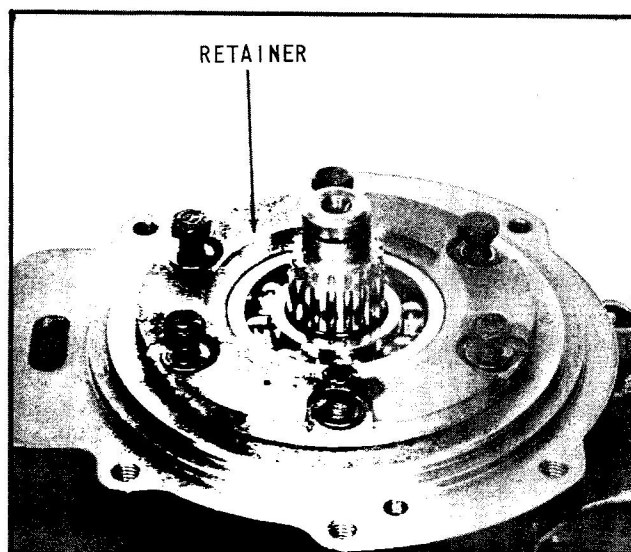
Assemble Bearing Retainer (1.5 to 1 Ratio)
